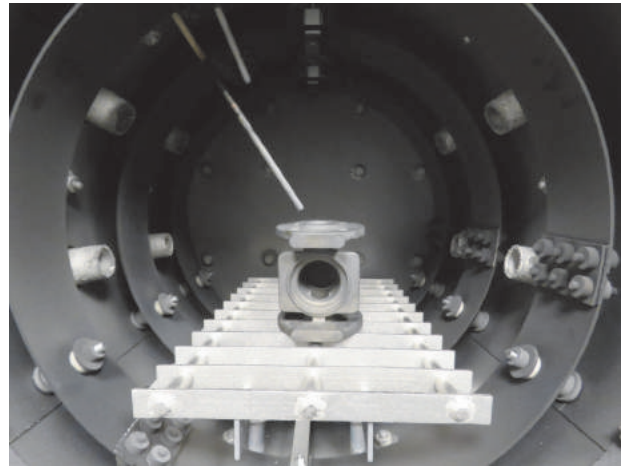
Heat treating a BJP-printed part requires precise temperature measurement.
